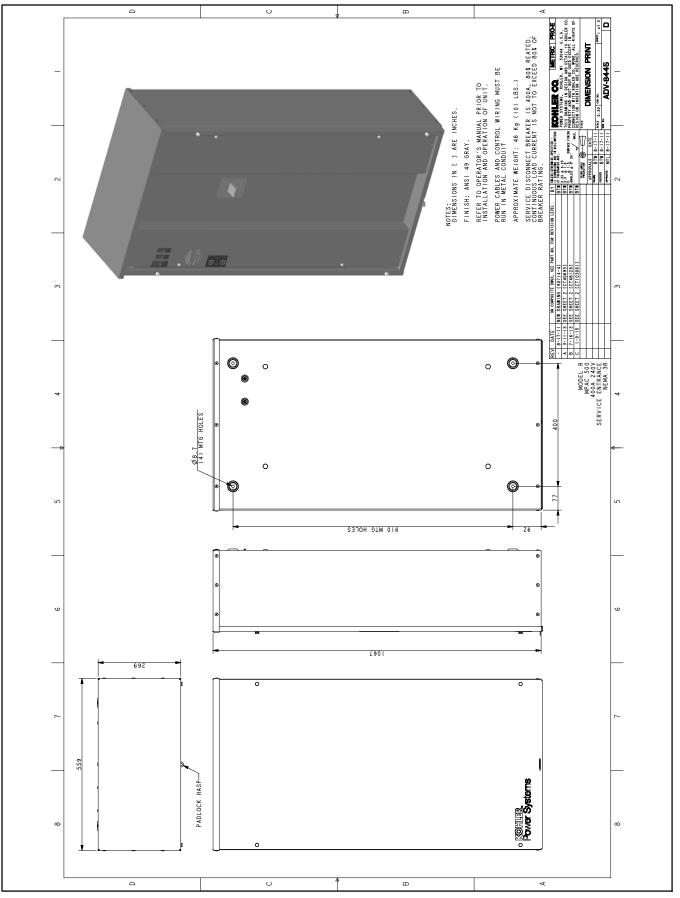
Dimension Drawing, 400 Amp Service Entrance Model, ADV-8445, Sheet 1 of 2
